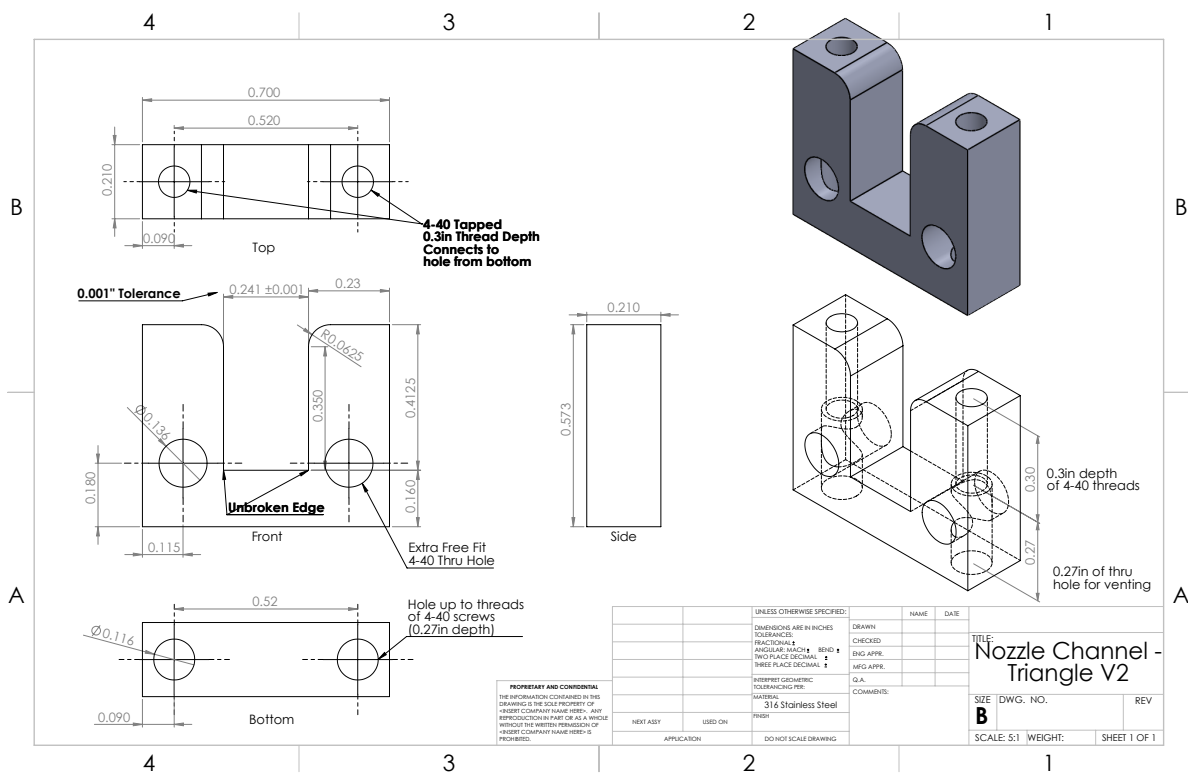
The U-shaped channel piece into which two wedge pieces of the form shown in figure E.4 are to be loaded, followed by the loading of the stacked array of microcapillaries.
